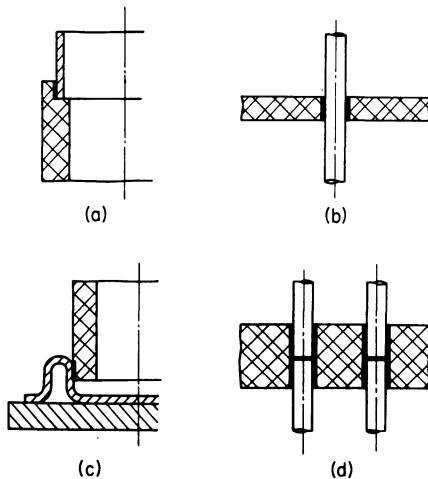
Cylindrical ceramic–metal inside seal: (a) tubular seal; (b) rod seal; (c) elastic seal; (d) multiple rod seal
